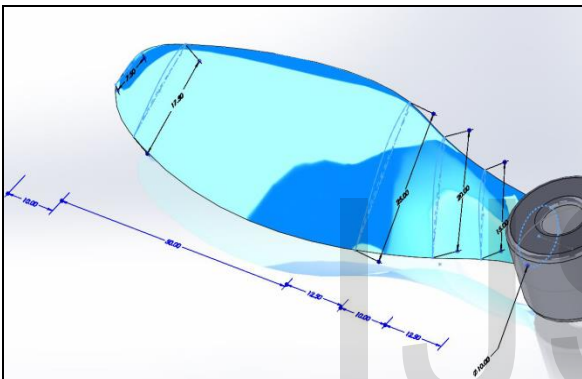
PROPELLER BLADE WITH DIMENSIONS
